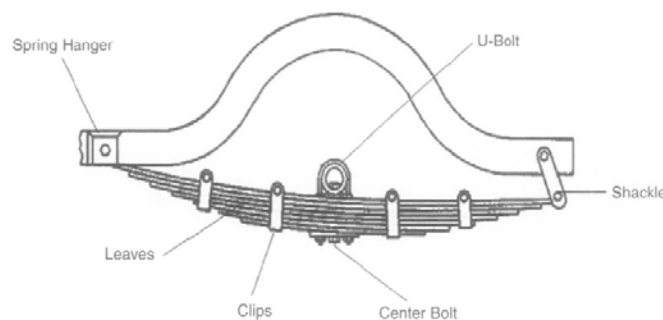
leaf springs assembly and component (Leevy, G., et. al., 2004)
